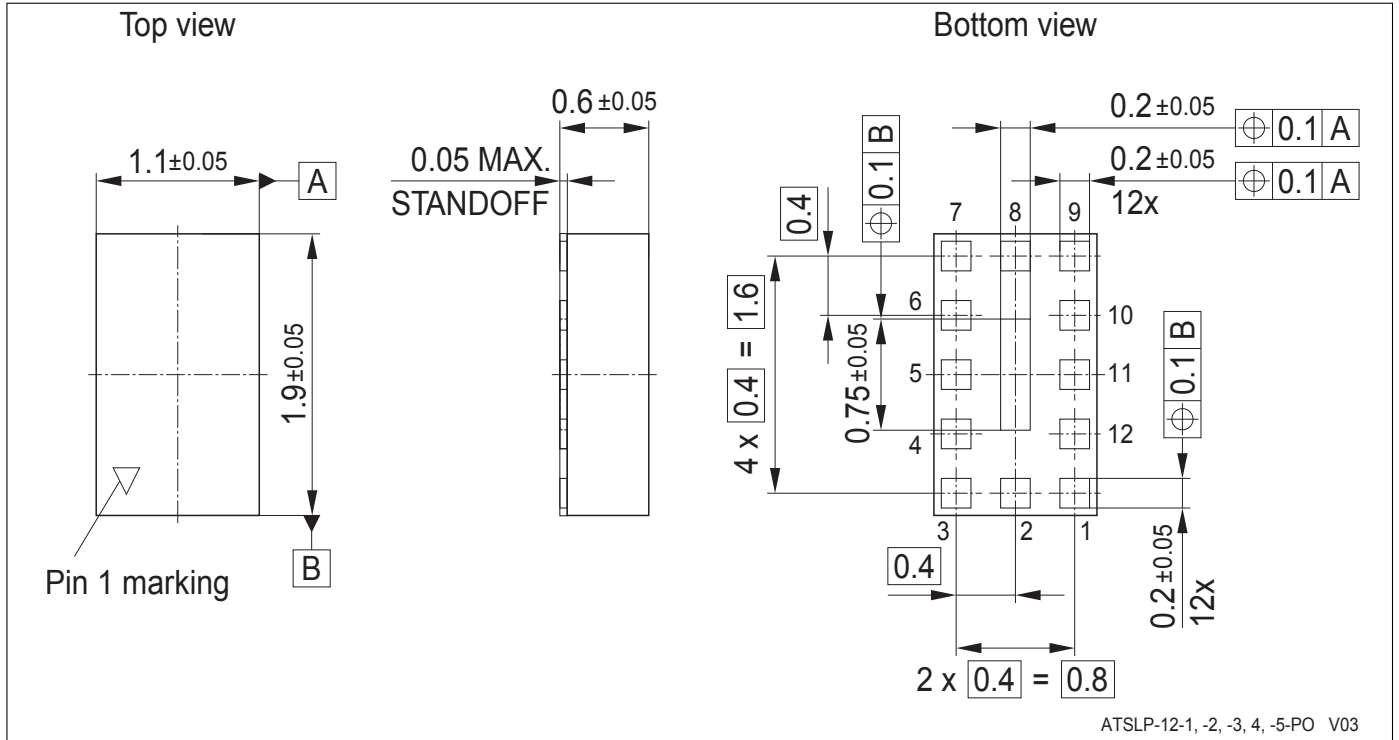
ATSLP-12-3 Package Outline (top, side and bottom views)
